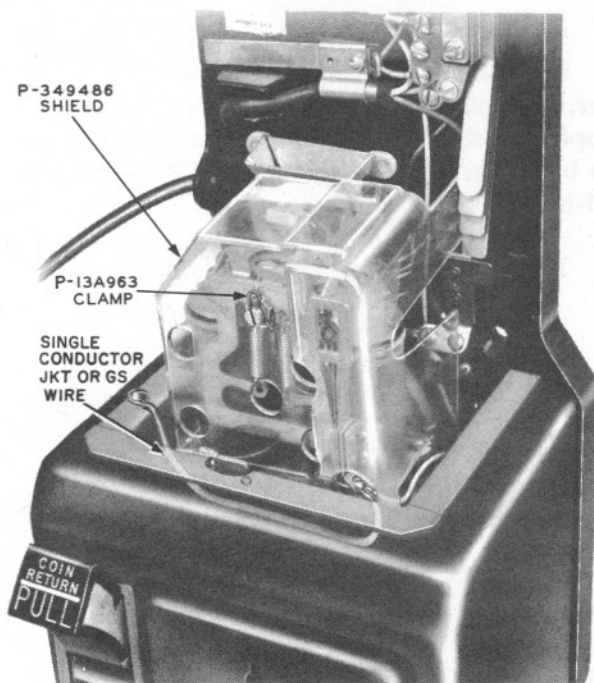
Method of Grounding Backplate Assembly, Open-type Installation
